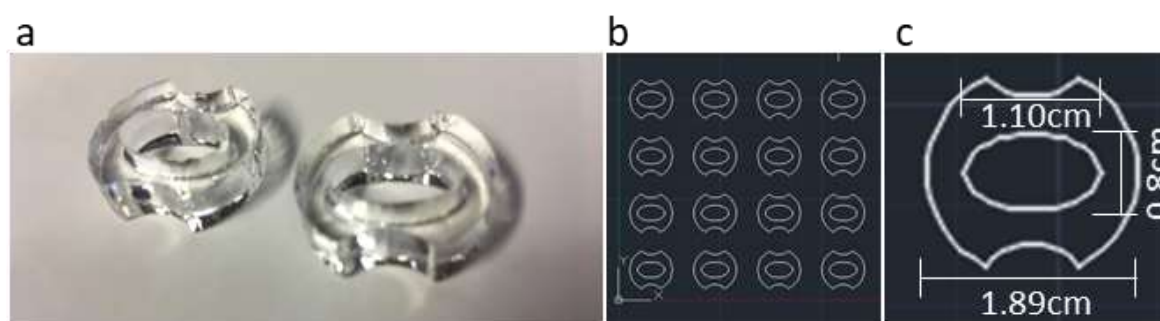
a. Example 5mm acrylic stacker design (MARK III). b. AutoCAD demonstration of an array of stackers ready for laser cutting. c. Dimensions of a single stacker on AutoCAD.
